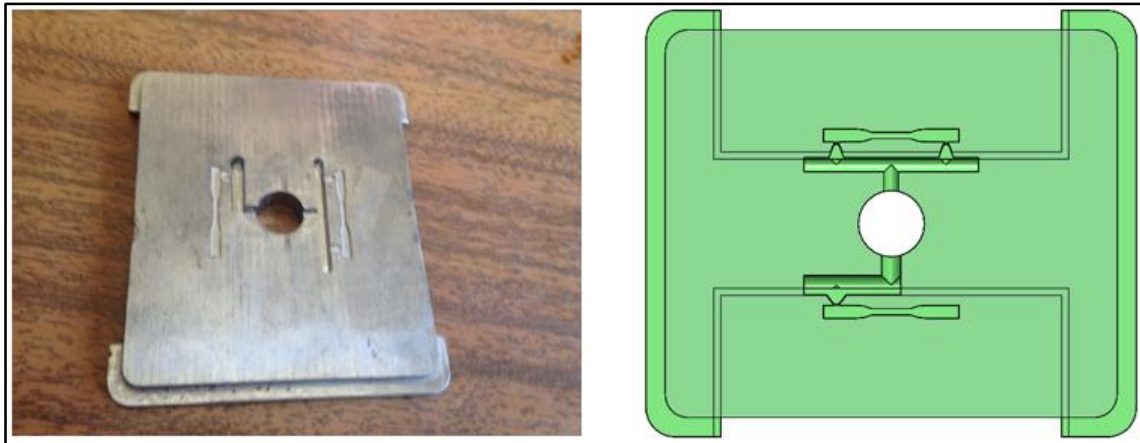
Top view of the cavity insert after (left) and before (right) manufacturing.
